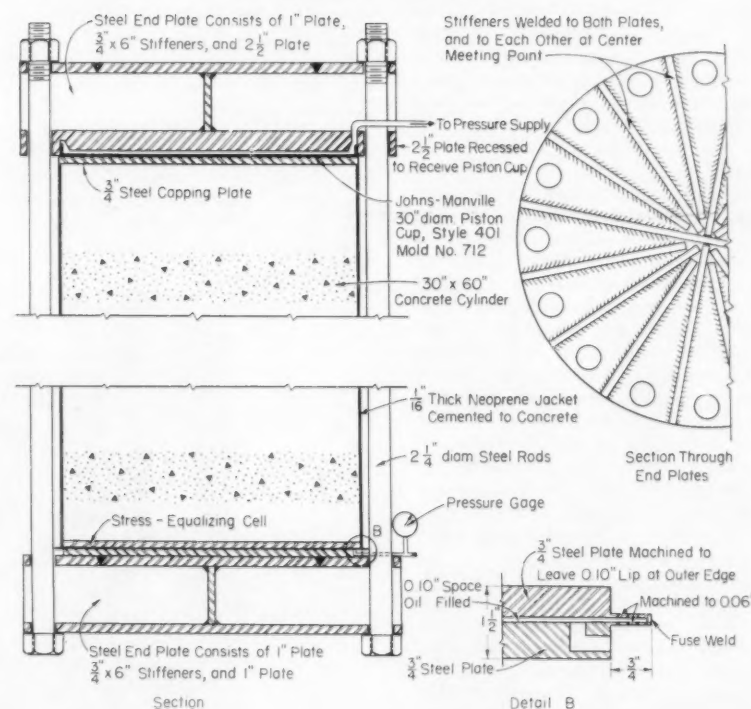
Loading frame for 30 by 60-in. concrete cylinder.
